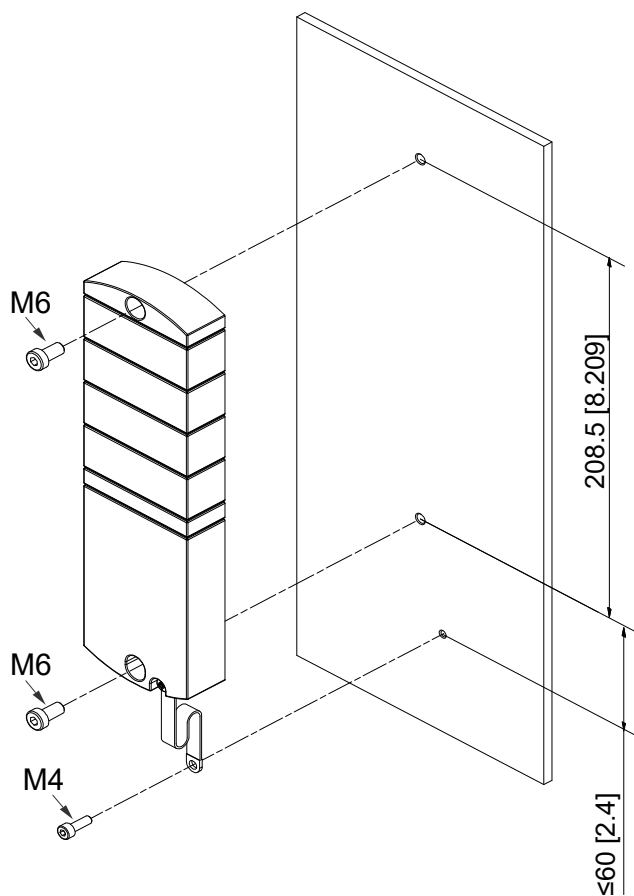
Fasten module. Dimensions in mm [in] (figure similar)
